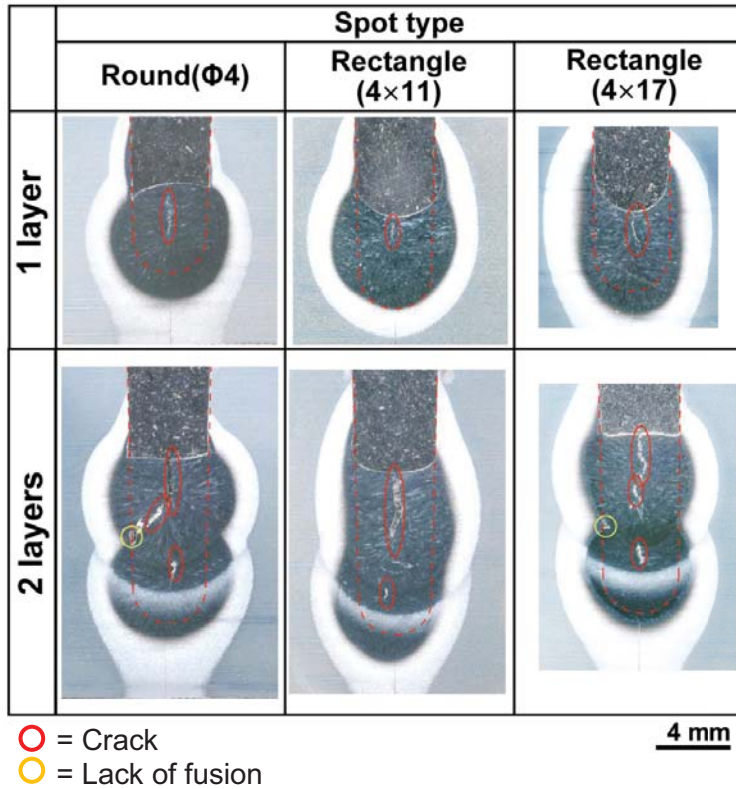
Comparison of cross-sectional welds in each laser spot shape.
